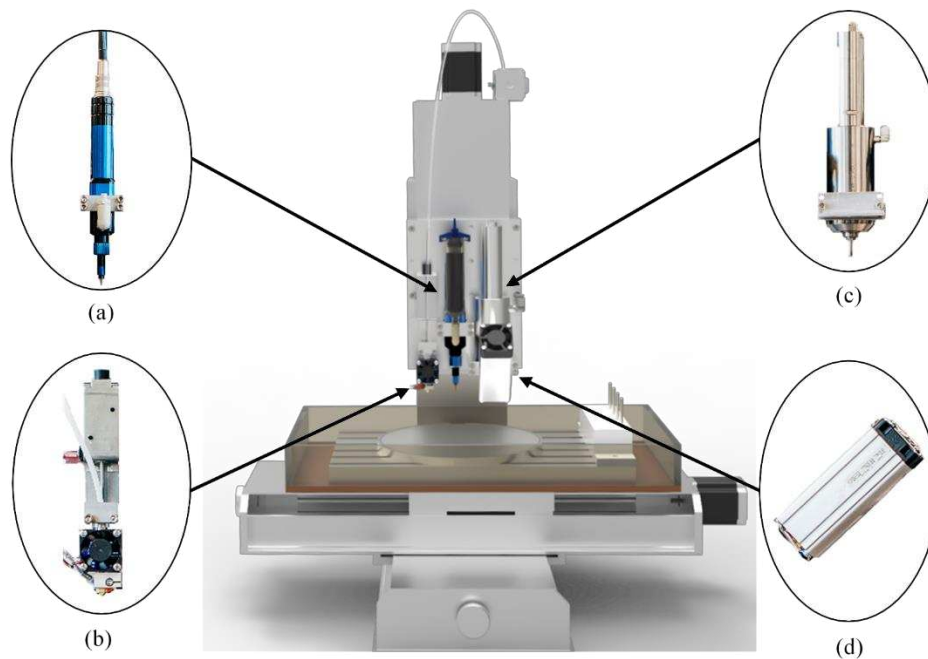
CAD rendering of the hybrid manufacturing equipment (a) high viscosity paste dispenser (b) hot end and extruder for sacrificial support generation (c) machining spindle and automatic tool changer for subtractive processing (d) forced convection drying unit for accelerated drying of the deposited ceramic paste.
